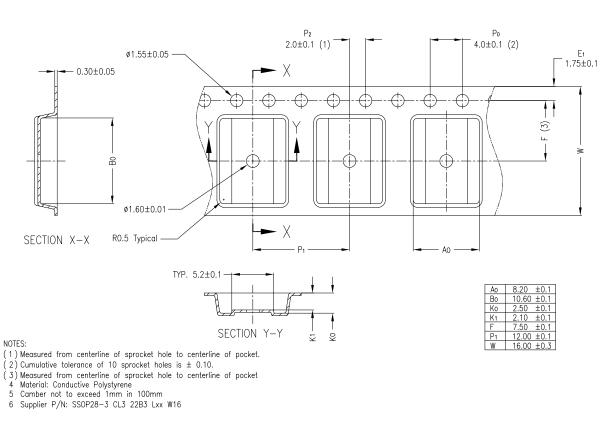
28-pin SSOP (209 Mils) (C-Pak) Carrier Tape Drawing, 51-51100
